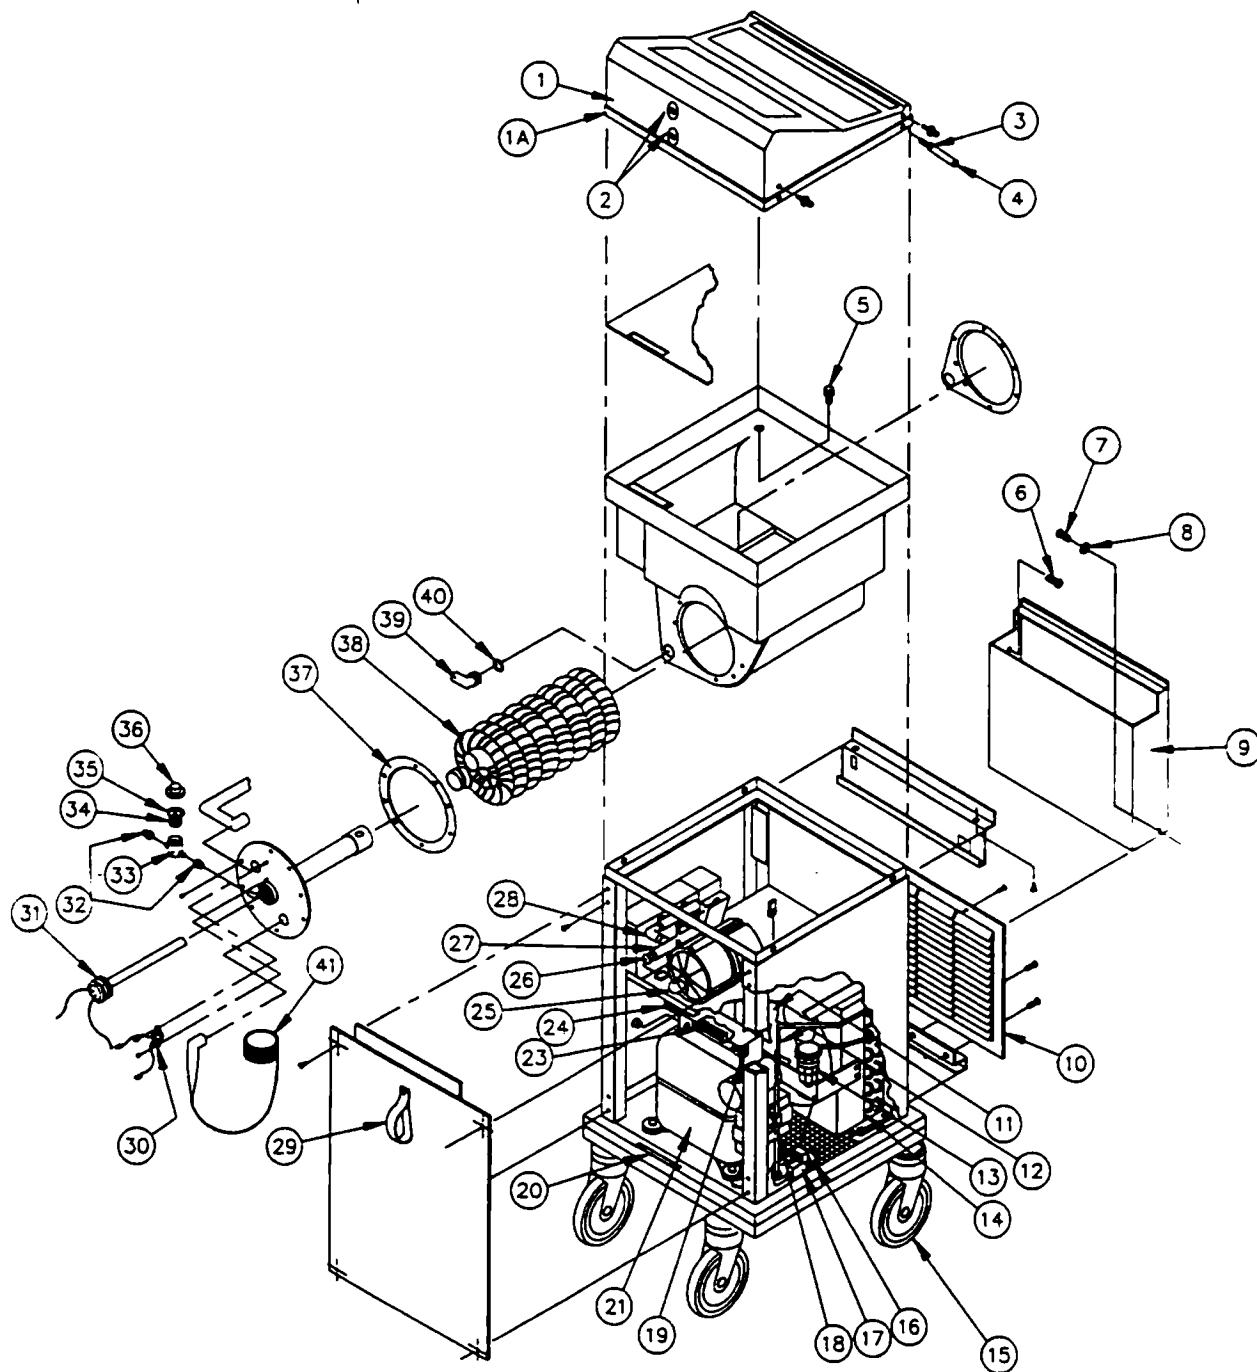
BLANKETROL II INTERNAL EXPLODED - REAR VIEW
